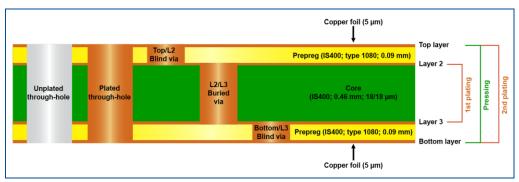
A 4-layer PCB structure with blind vias and buried vias
